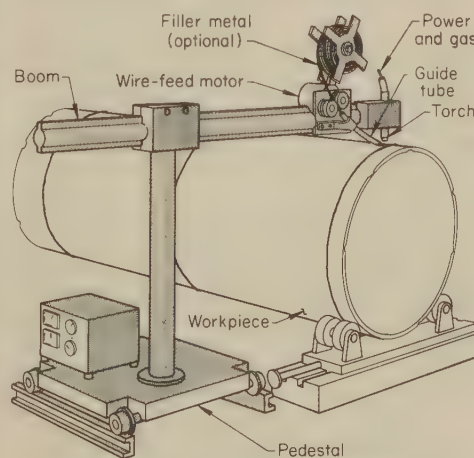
Use of a pedestal boom manipulator for making a circumferential (girth) weld
